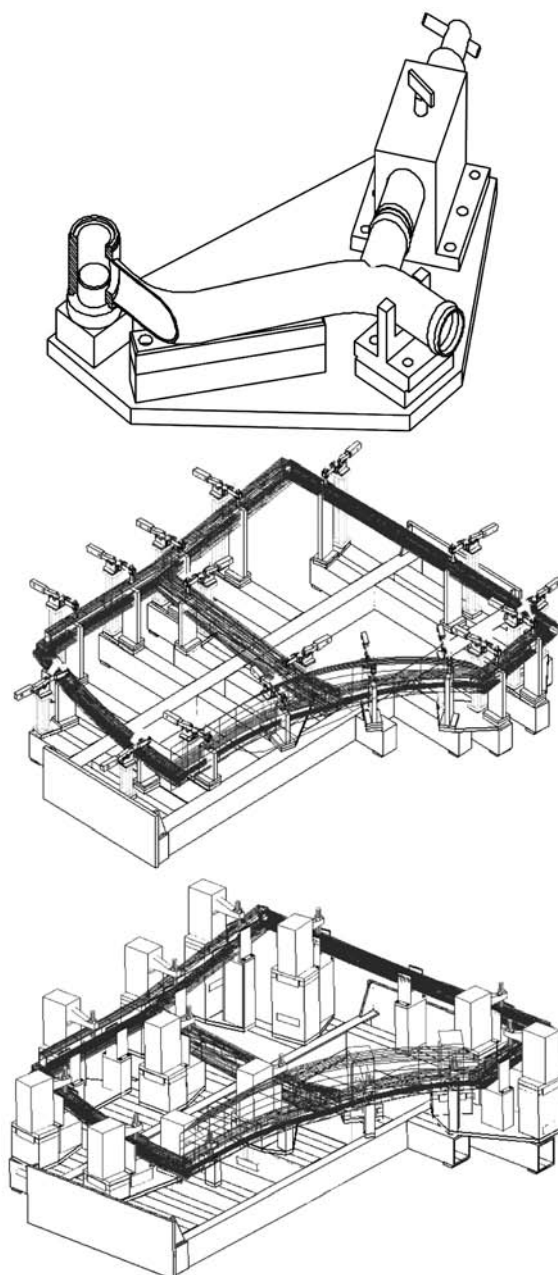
Examples of INWELDEN computer-aided fixture design
